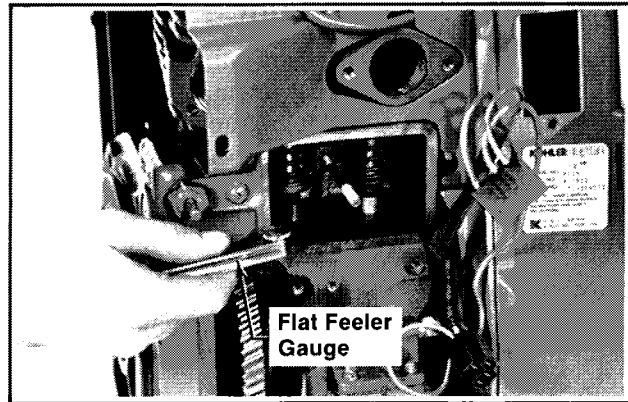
Measuring Valve-To-Tappet Clearance.
